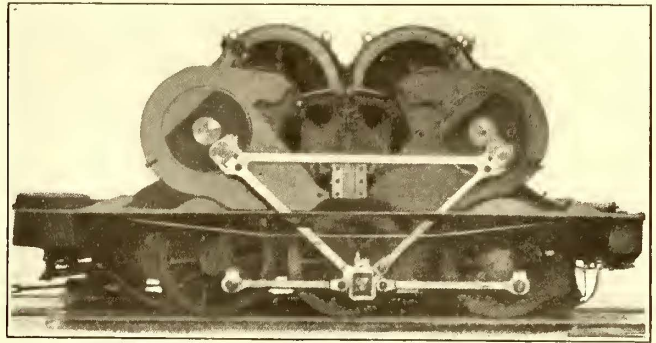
MOTOR MOUNTING AND CONNECTING ROD DRIVE
